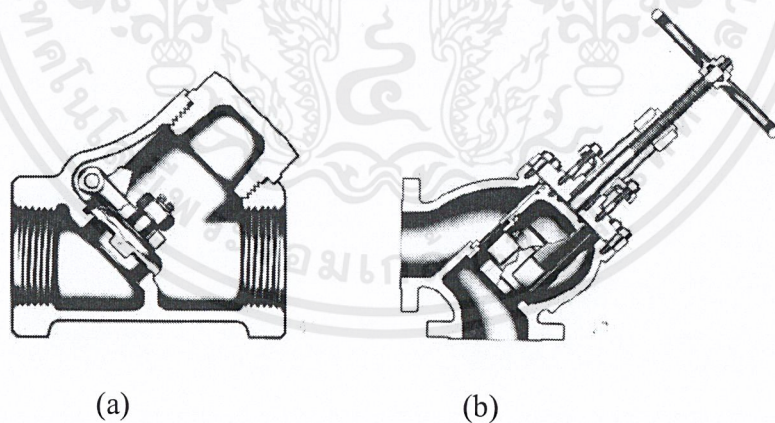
Check valve: (a) swing check valves and (b) stop check valve
